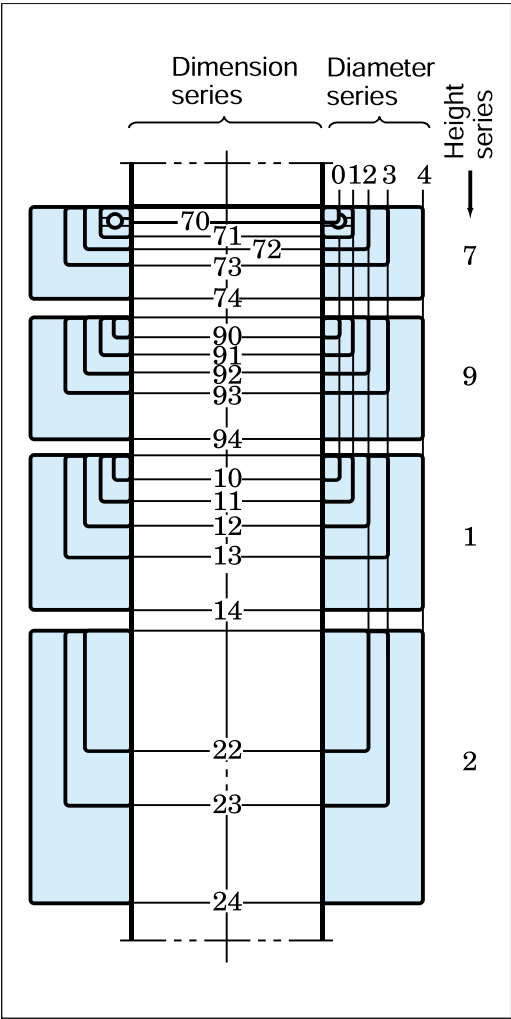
Thrust bearing dimension series diagram (diameter series 5 omitted)
